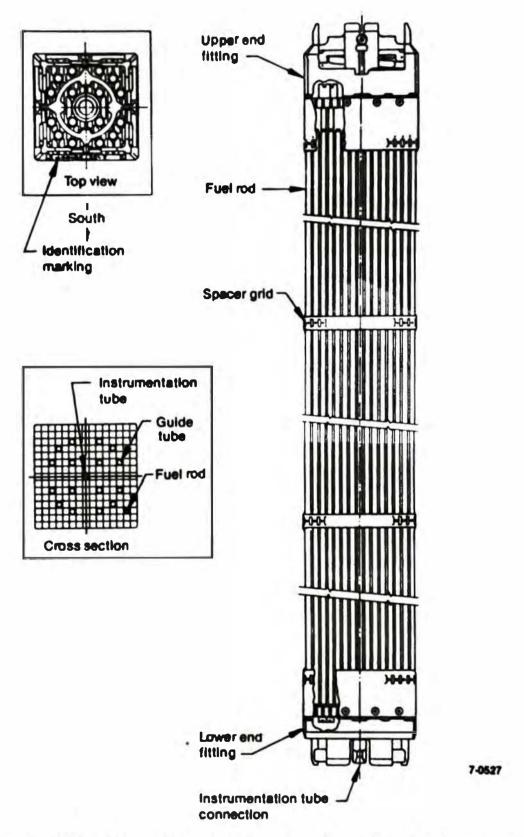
Side, top, and cross-sectional views of TMI-2 fuel assembly.
